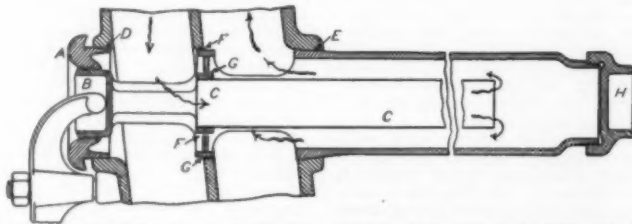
SECTION OF HEADER, SHOWING CONE FITTINGS AND ATTACHMENT OF A TUBE TO THE HEADER.
